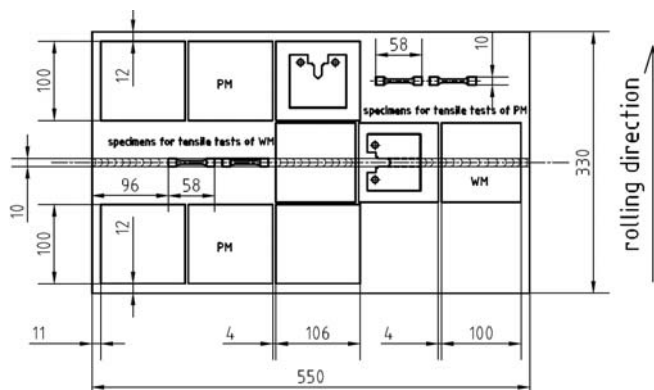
Scheme of cutting CT and tensile test specimens, cut from PM and WM of the SAW welded joint.
